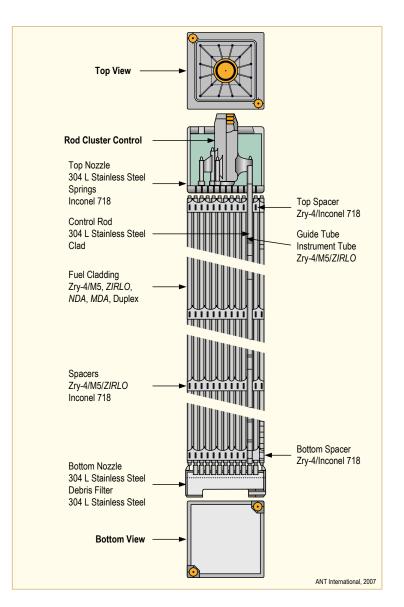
Typical PWR fuel assembly [Rudling & Patterson, 2009].
